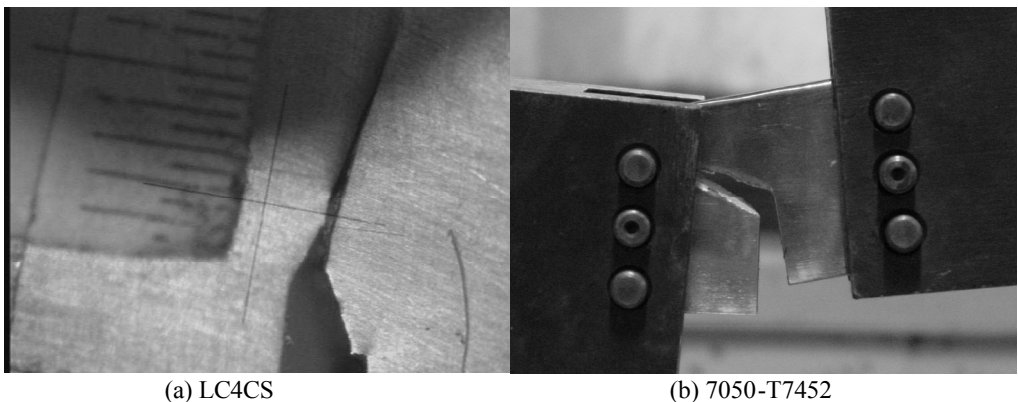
Macroscopic fracture appearances of the same thickness under pure II loading
